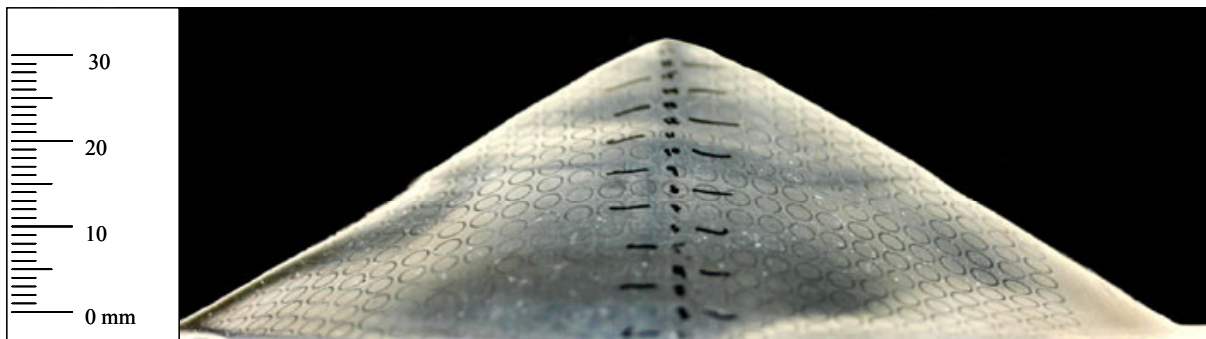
Buckling near the vacuum hole in a AA5754 sheet sample formed into the 45° cone.
